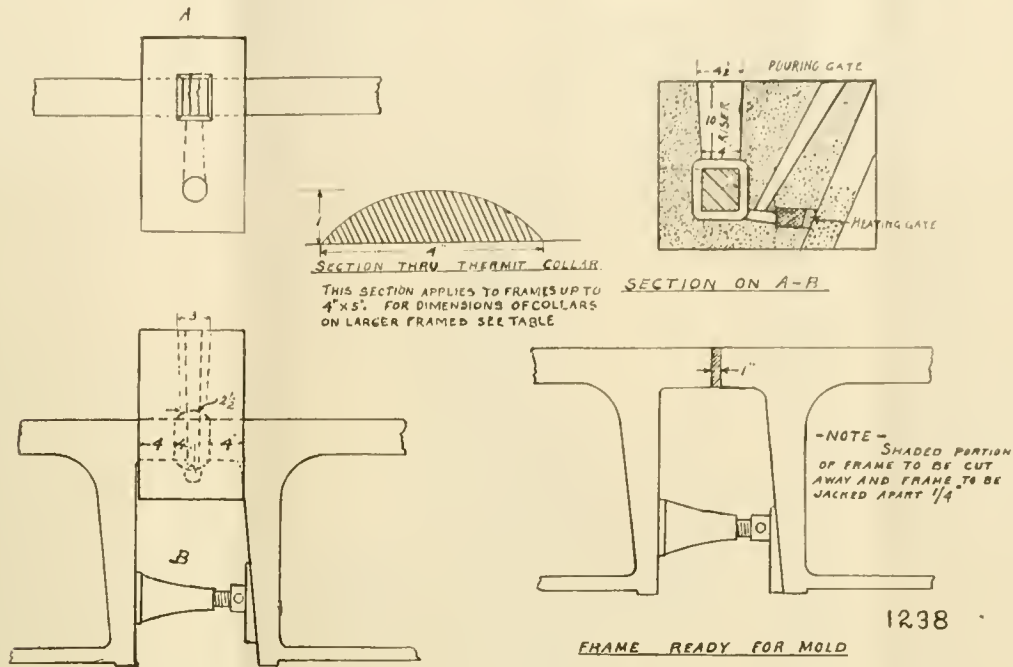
METHOD TO BE EMPLOYED IN WELDING LOCOMOTIVE FRAME BROKEN IN JAW.
